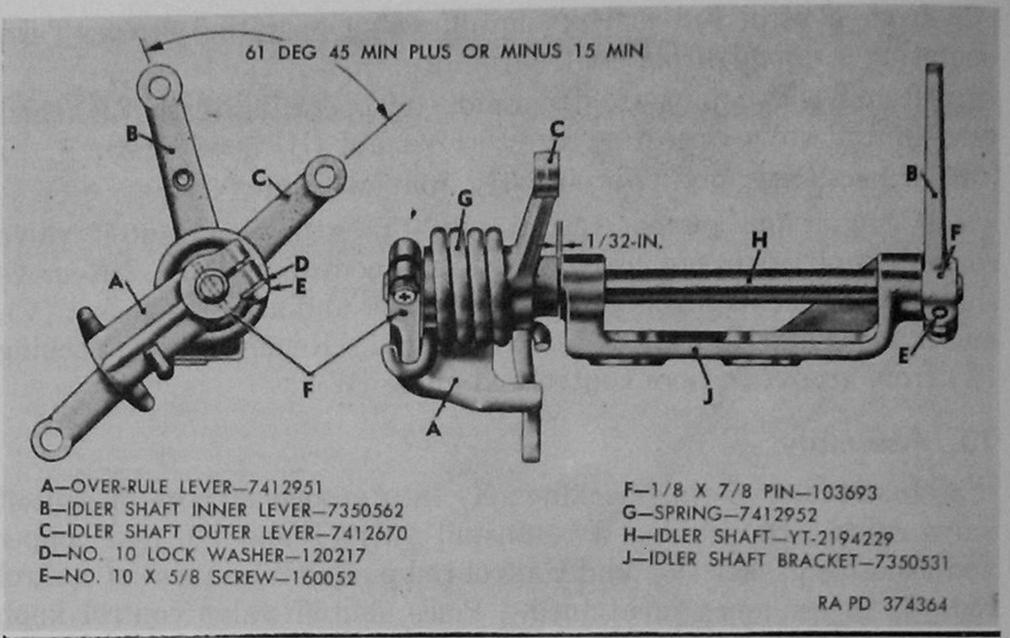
Carburetor throttle control bracket assembly—early engine assembly 7411599.
